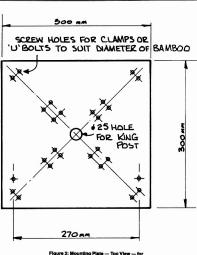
Mounting Plate — Top View — for Modified X-Beam.
